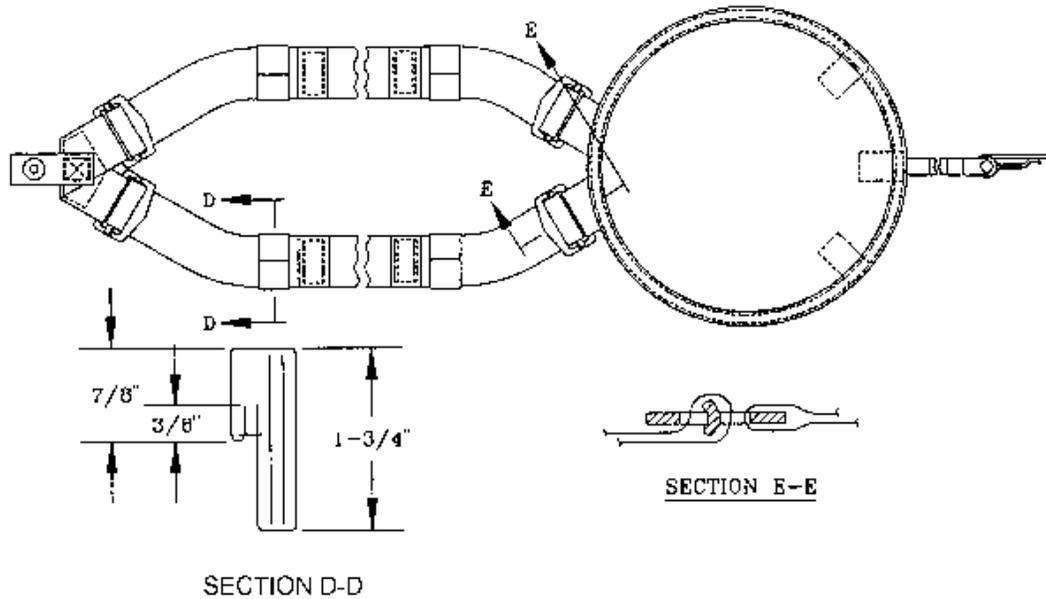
(CONTAINER FRONT MOUNTED) VERTICAL RESTRAINT ASSEMBLY (SHEET 1 OF 3)
